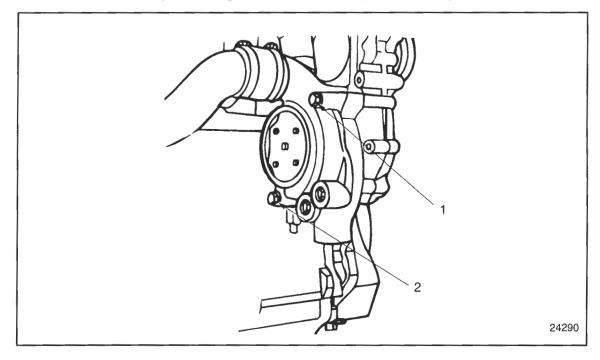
Gear Case Cover Bolt Arrangement (Right Rear)
